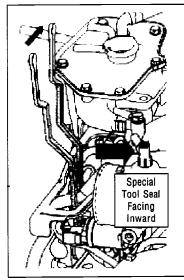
Insertion of Special Tool through the upper opening for Front Bolt (RH)
